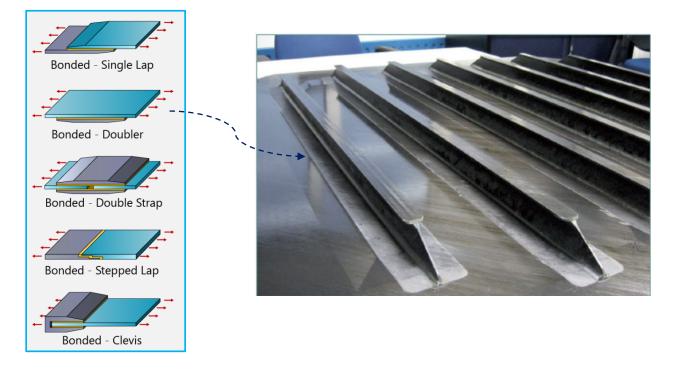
, A stiffened panel, bonded doubler joint, of the attached flange to skin.
